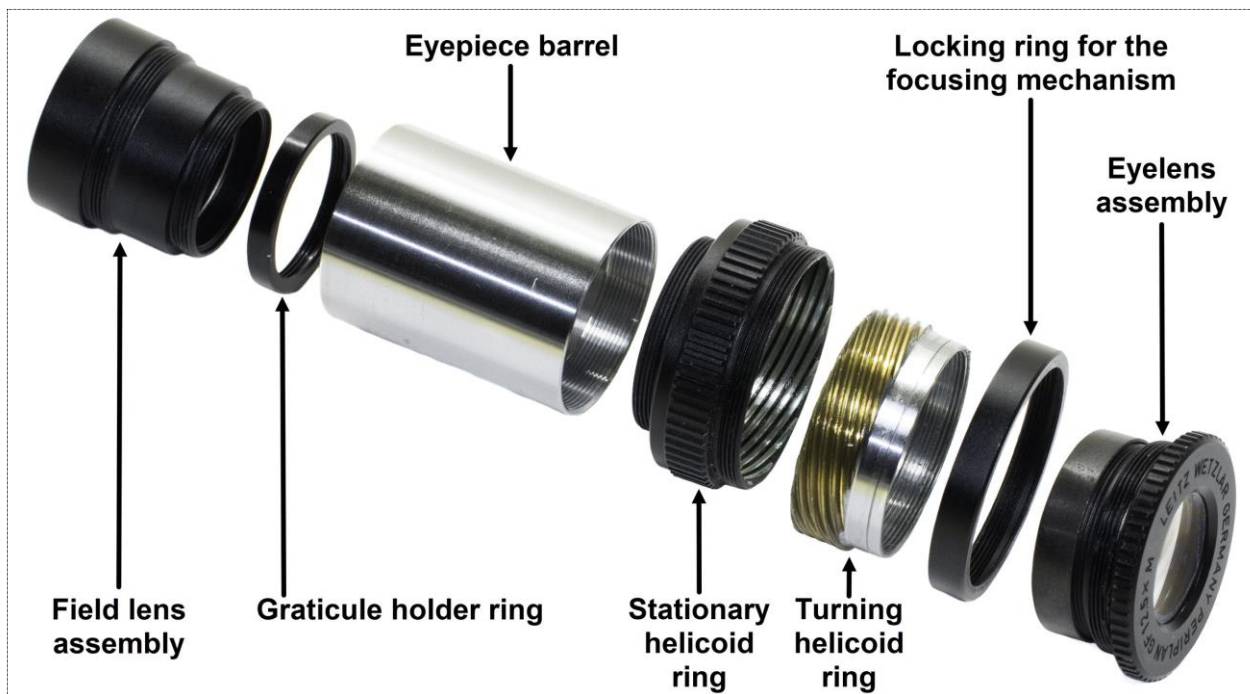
Exploded view of a Leitz Periplan GF 12.5x M eyepiece. It illustrates the “newer” design.
